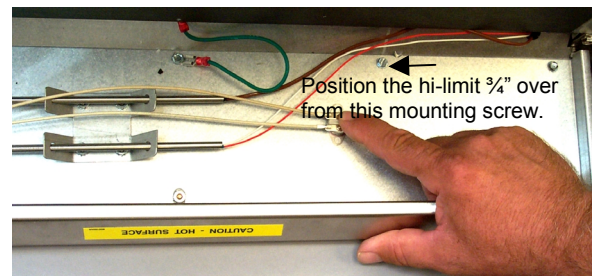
Use the hi-limit's mounting flange as a template for mounting holes. Position the hi-limit 3/4 inch left of the panel mounting screw. (see photo annotation) with the flange mounting tabs parallel with the mounting holes on the RTD bracket.
